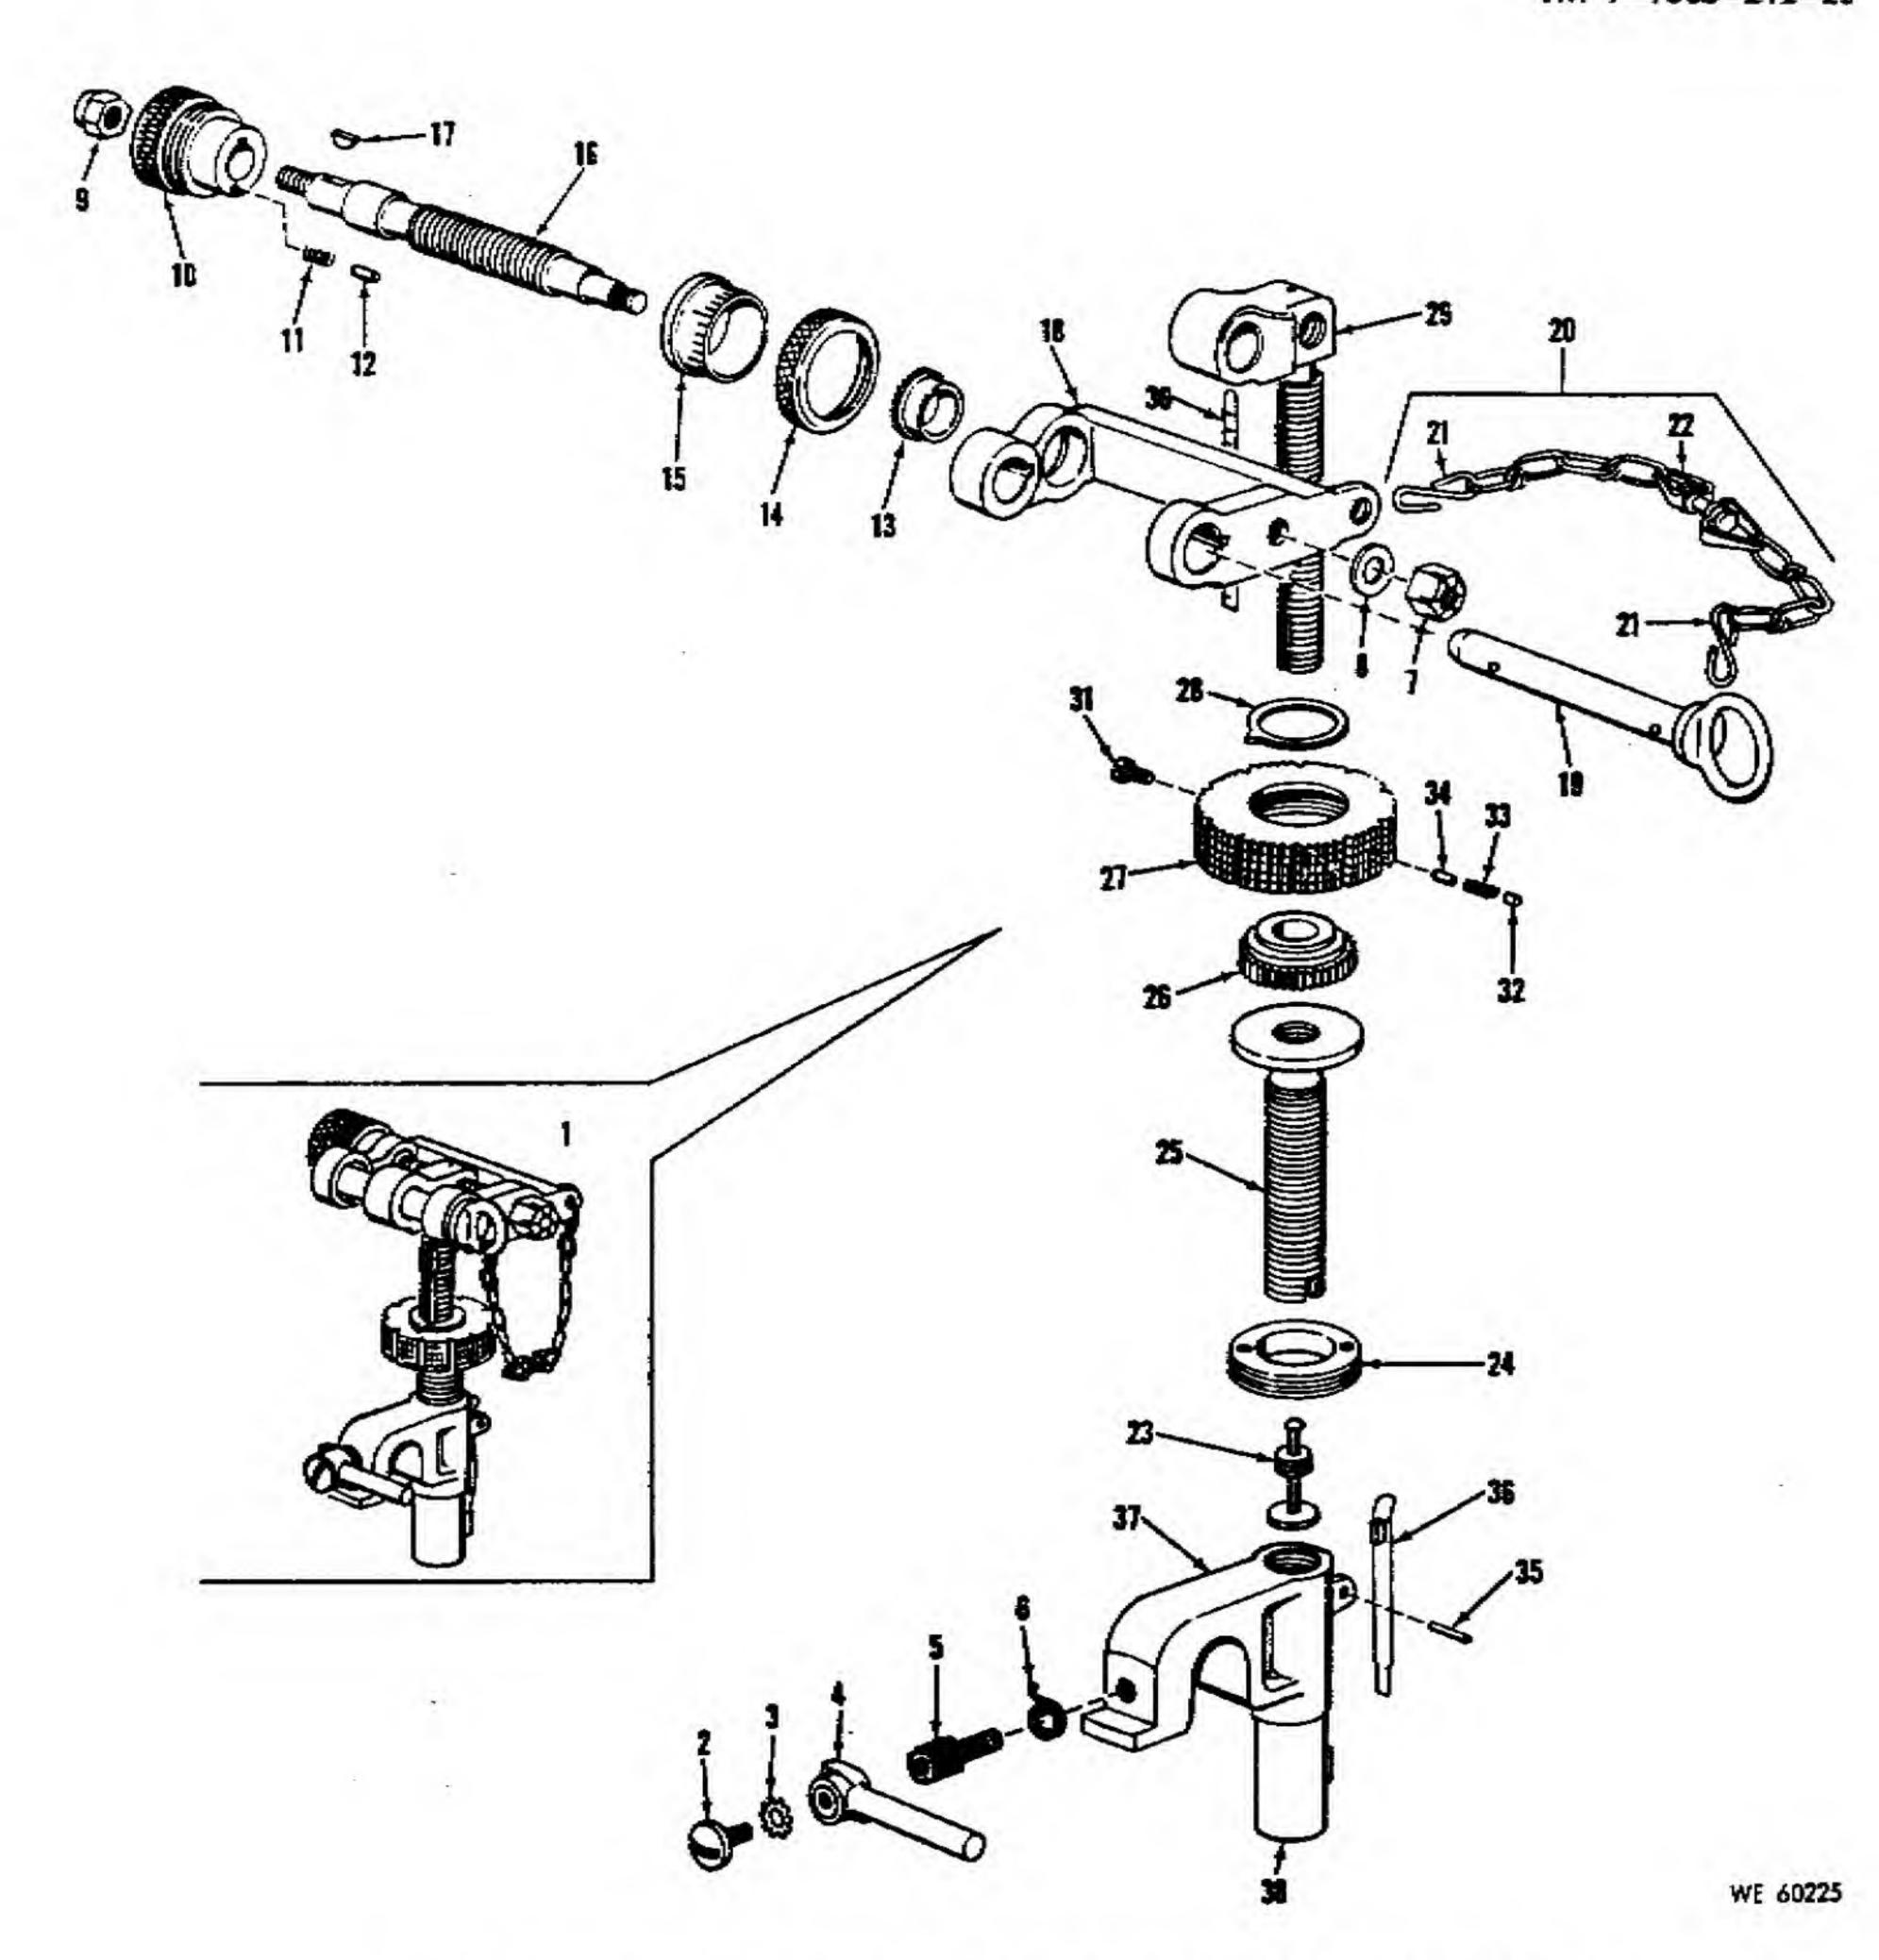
Traversing and elevating mechanism assembly for Machine Gun Tripod Mount, M2—exploded view.
